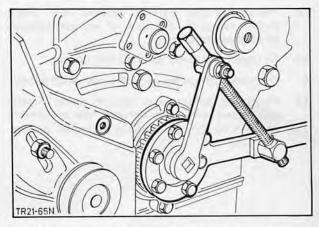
Fit crankshaft hub centre bolt using Special Tool 21-018/019
